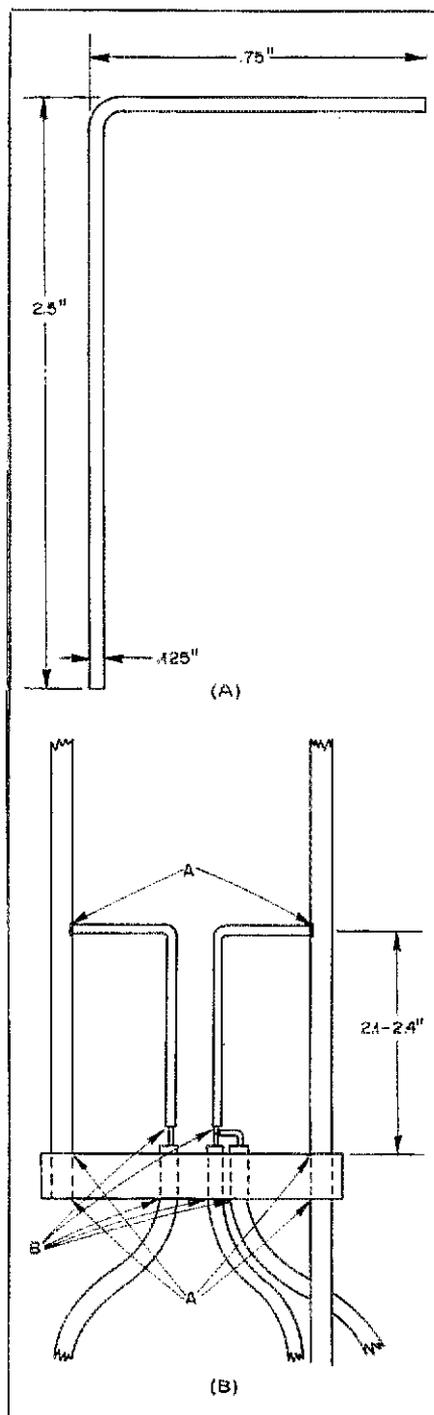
At A, bending dimensions for the Q bars, and at B, the details of the mounting of the Q bars and 4:1 balun. Points marked A are secured with silver solder, and rosin-core solder is used at points marked B.
